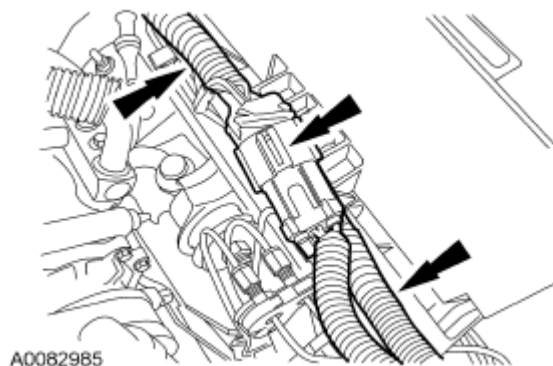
Locating Electrical Connector And Wiring Harness Retainers
